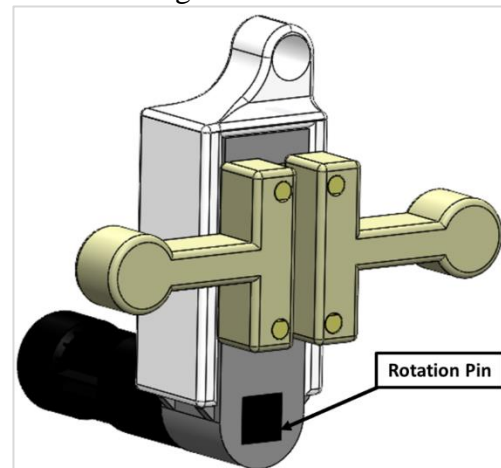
Assembly of the Intermediate Shoulder-Mandible Element
